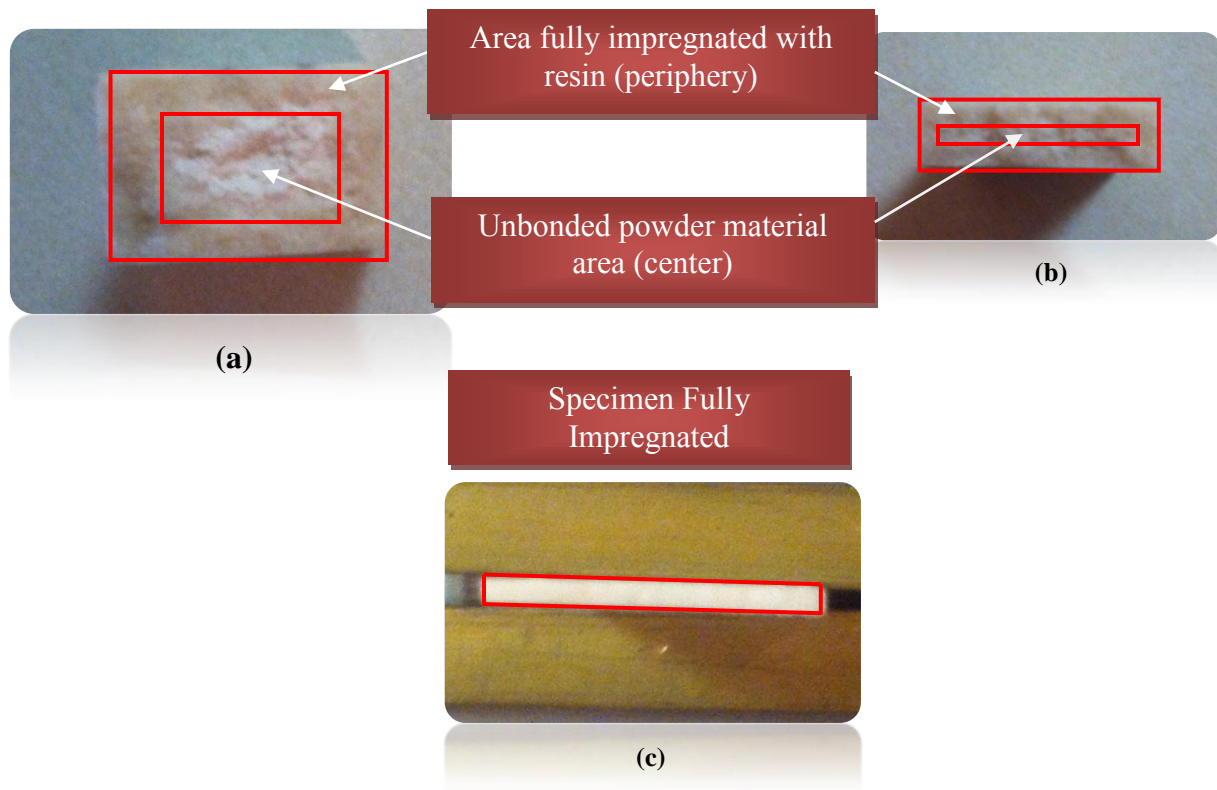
Z Corp. 10 mm-Thick Specimen (a), Z Corp. 4 mm-Thick Specimen (b), and Z Corp. 1mm-Thick Specimen (c)
